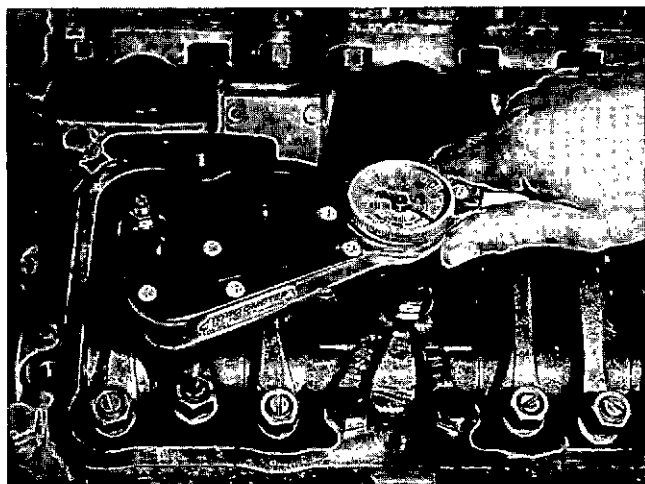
, V414190. Adjusting injector plunger with torque wrench
